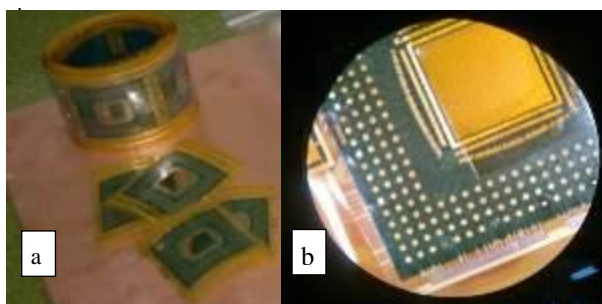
(a) Flexible BGA substrate and (b) Magnified view of solder ball pads
